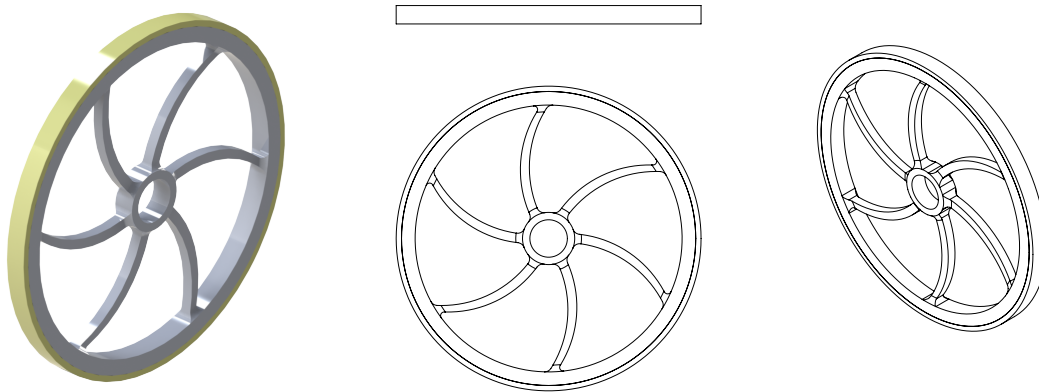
Wheel Concept 5 | Sprung Spokes - Render (Left) and General Drawing (Right)
